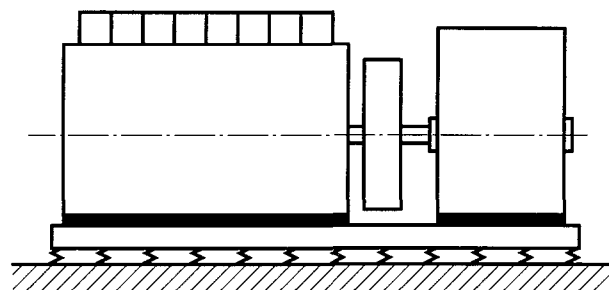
Engine and generator rigidly mounted on resiliently mounted base frame
